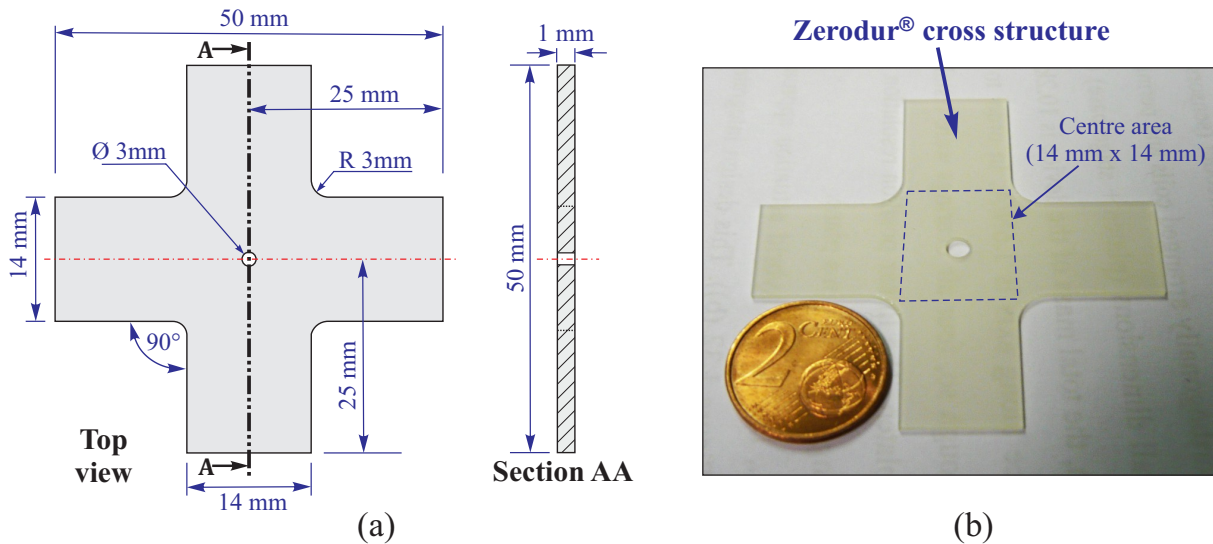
Geometrical design and fabricated mechanical cross structure
